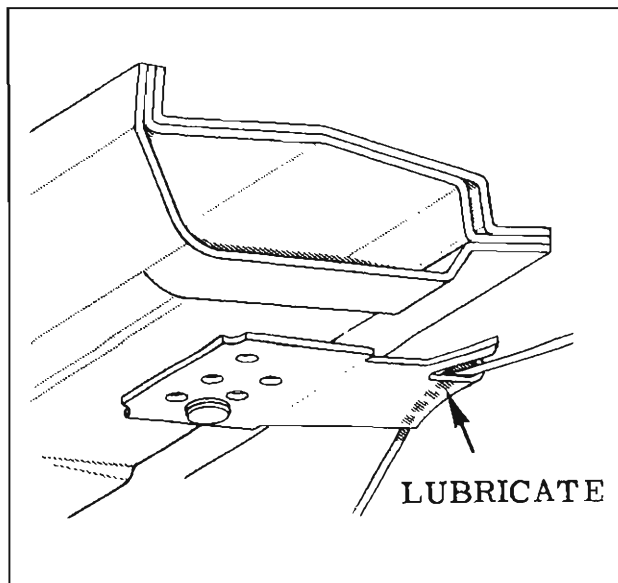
Seat Adjuster Locking Wire Retainer
